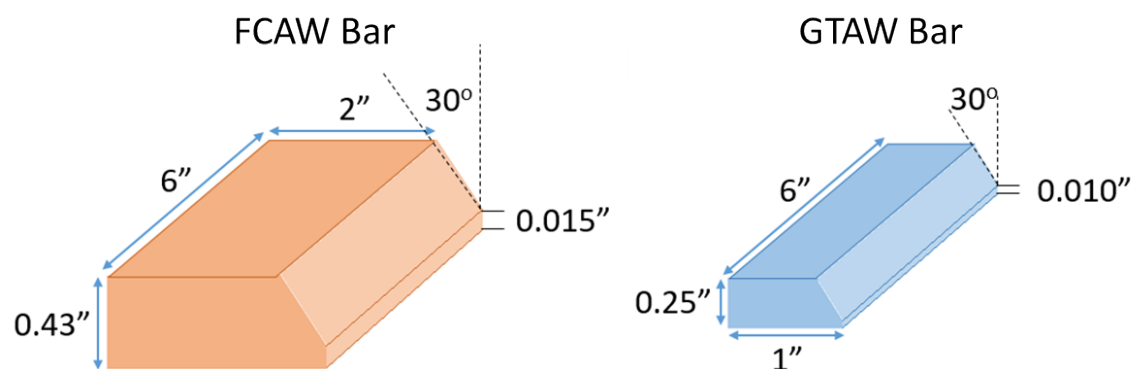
Weld bar geometries for the FCAW and GTAW type of welds are shown. For each weld trial, two FCAW or two GTAW bars and corresponding filler material are necessary for complete welds. Figure is reproduced from [4].
